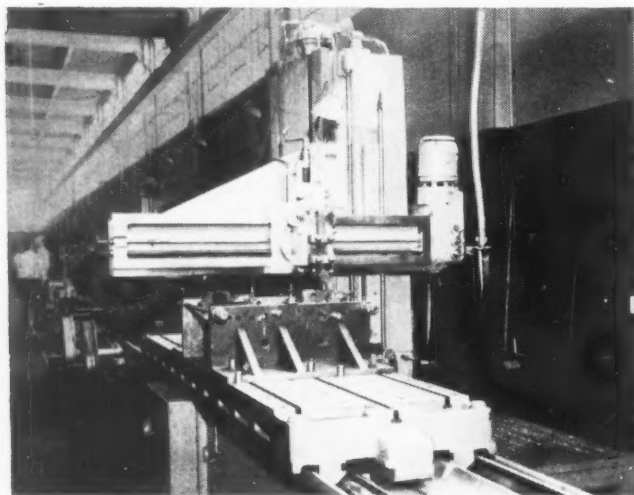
HEAVY DUTY PLANER on which the mating surfaces of each half of a locomotive split-frame motor and axle-cap mounts are machined, utilizing special jigs for positioning the motor frame.
